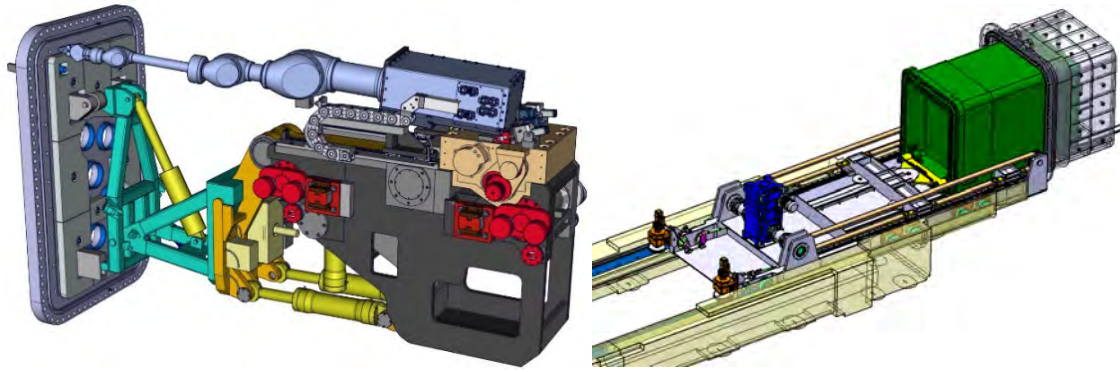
Final design of DRHS CMM handling the Primary Closure Plate (left). CPRHS EPP assembly cask in final design phase (right)
